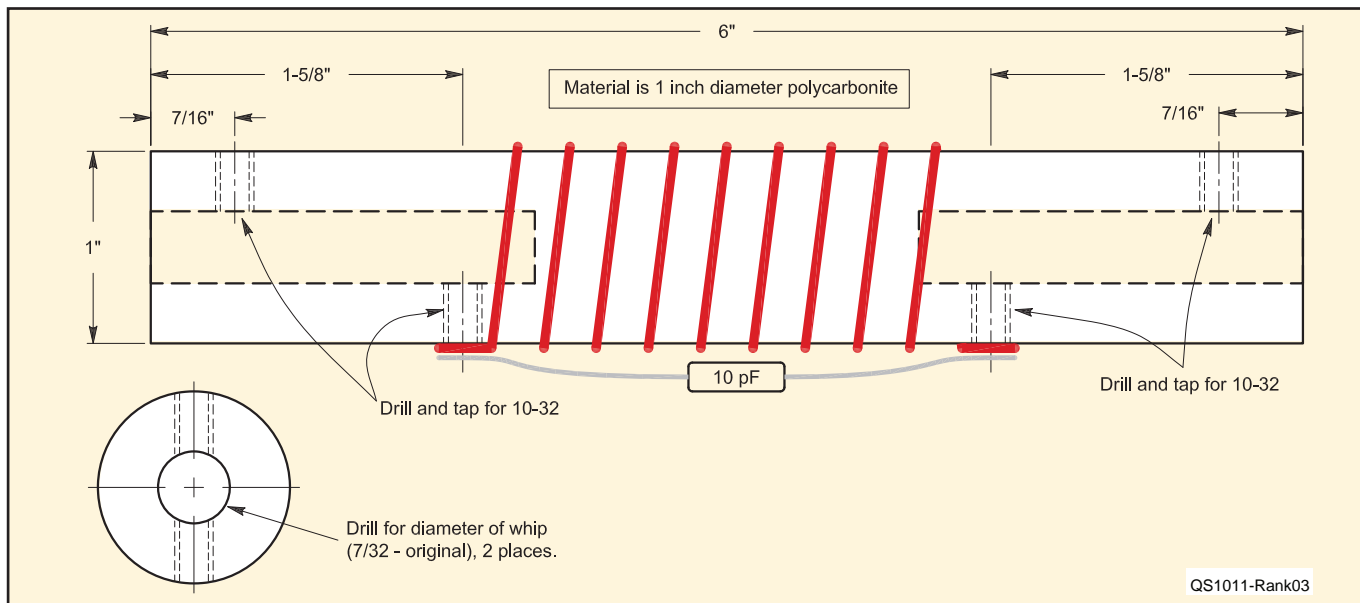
Details of trap construction. The machine screws are 10-32 x 3/4 inch stainless, Digi-Key part H721-ND, stainless steel; the nuts are part H727-ND.
